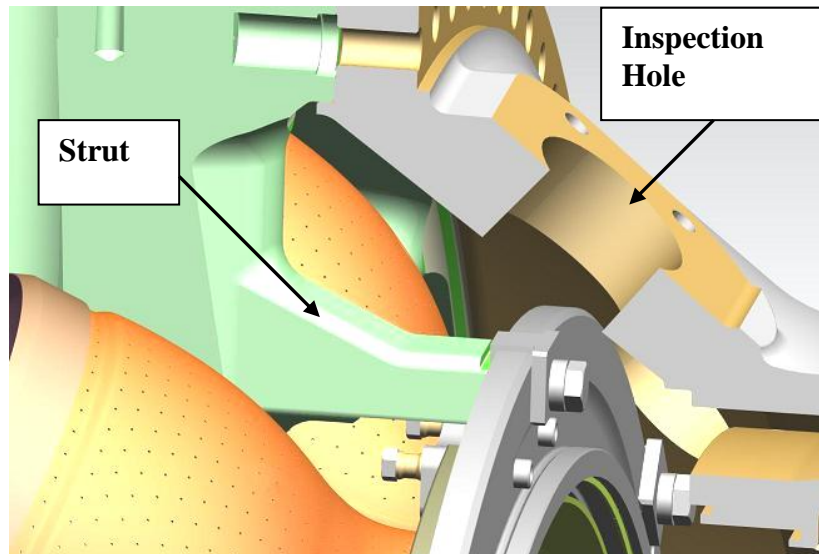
Inside the central housing, showing the strut that have to be redesign to enable access through inspection hole.
